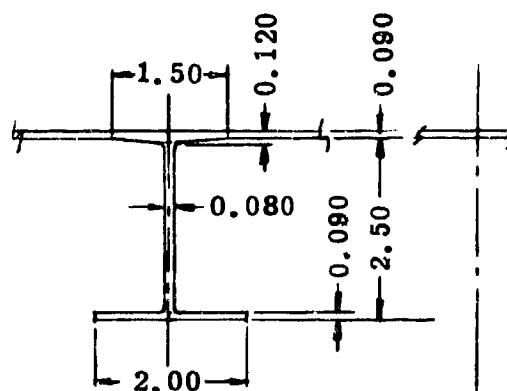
Plate--Stringer Design--Rivet and Bonded, Use FM-47 Bond
